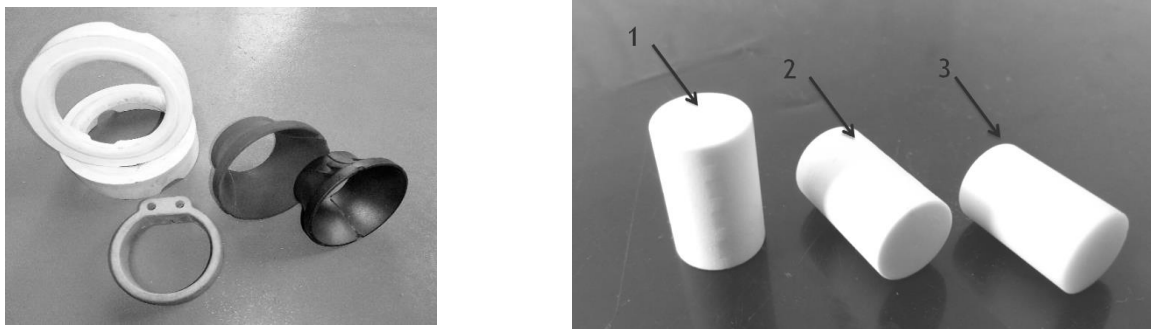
a) small parts of food equipment; b) specimens of ceramic products: 1 - technical porcelain; 2 -  $ZrO_2$ ; 3 -  $\alpha-Al_2O_3$
